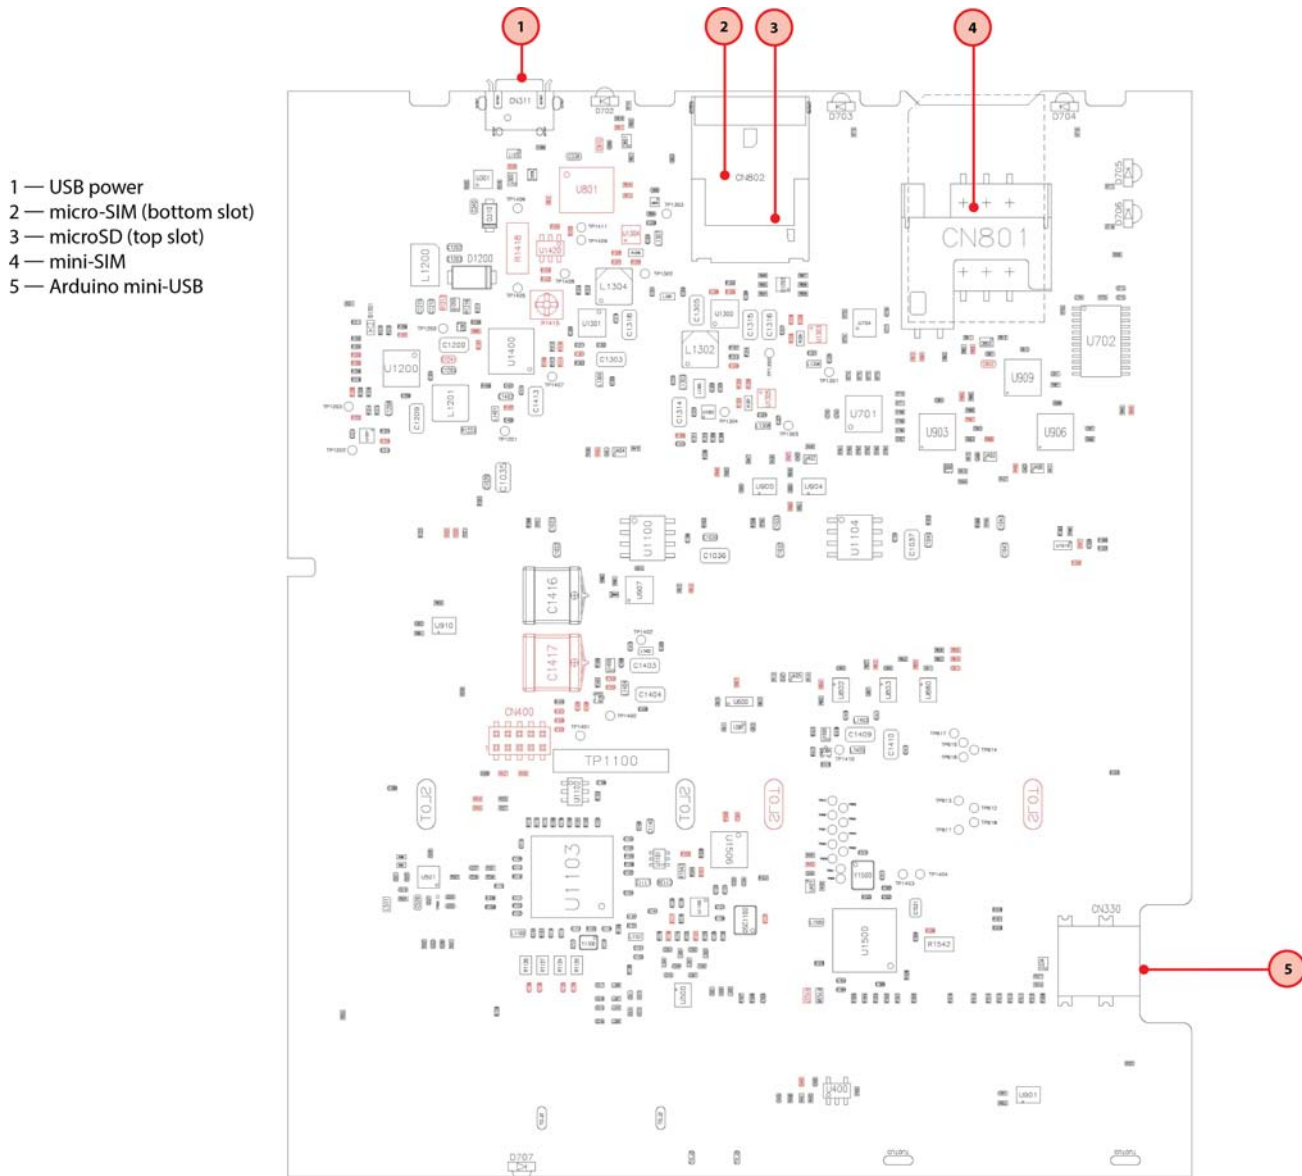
mangOH Platform Assembly - Bottom Side Switches/Connectors
